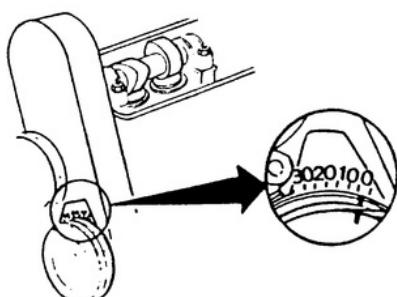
Checking valve clearance for the No. 1 cylinder — B230F and B230FT engines
